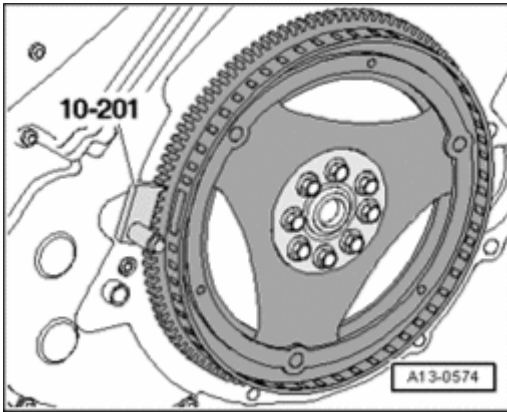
Inserting Counter Hold Tool 10-201 To Loosen Bolts
